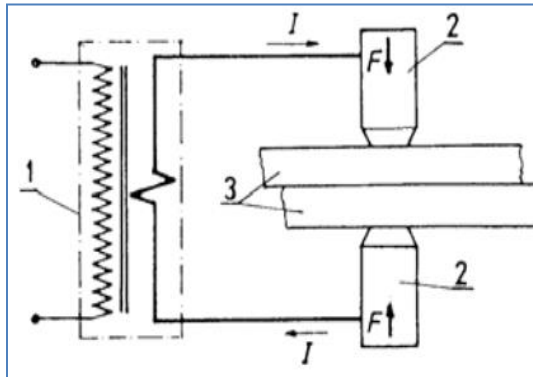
Detailed scheme of Spot welding process [12]
